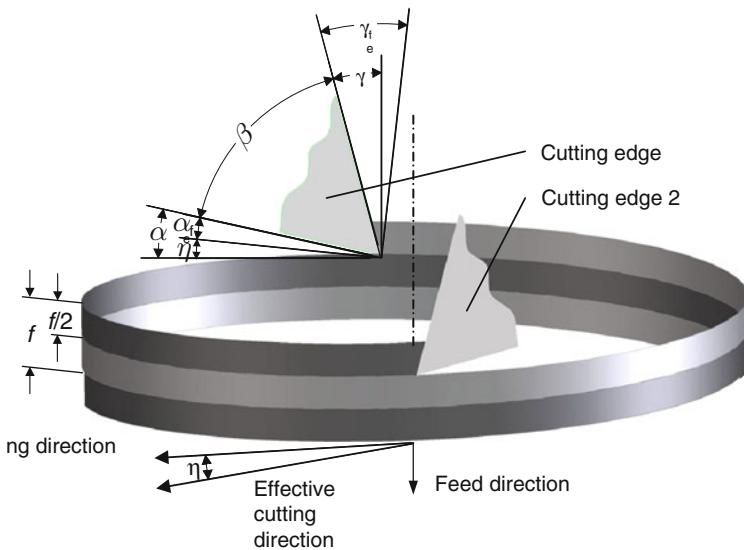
Motion sequence of the major cutting edges by double edged drilling tool
